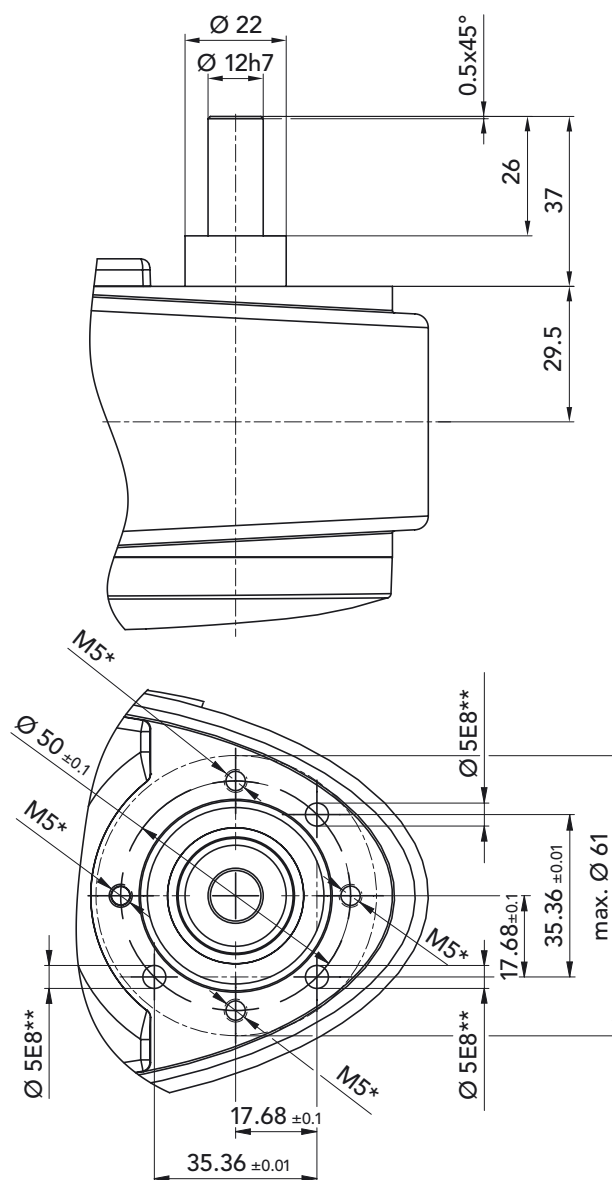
Dimension sheet SHA-340-...-OZ
